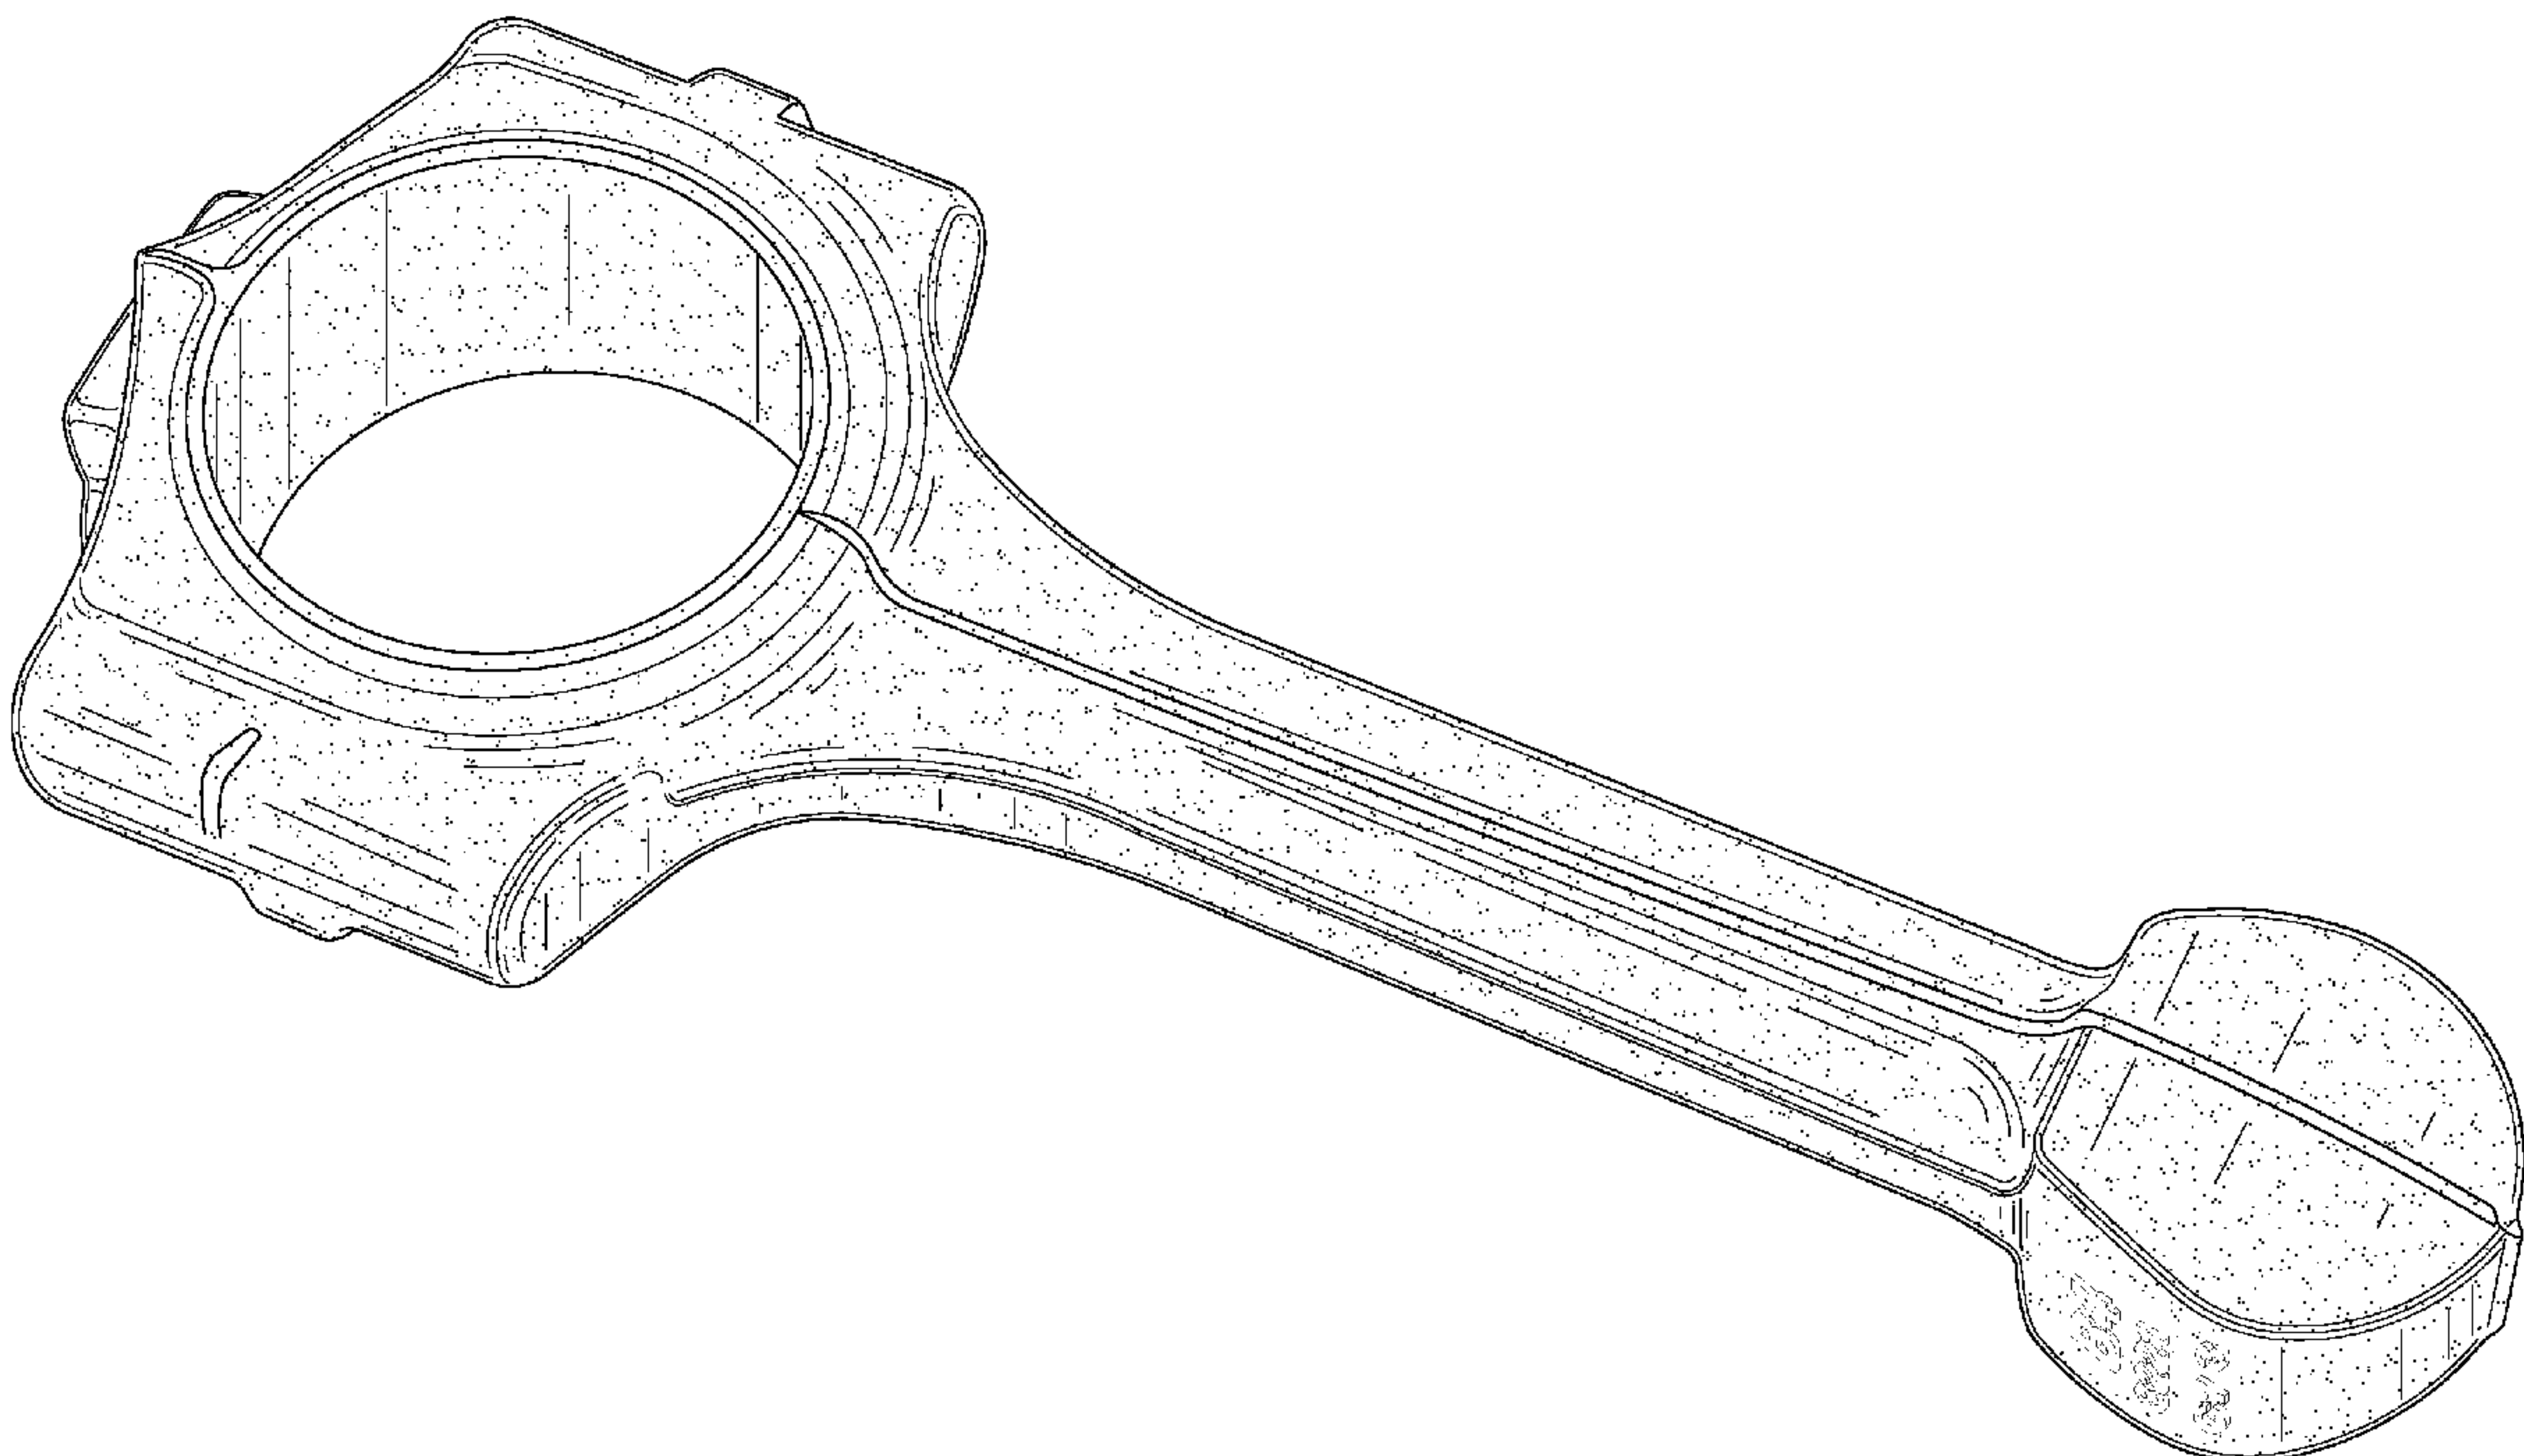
is a back perspective view of the connecting rod of FIG. 1.
